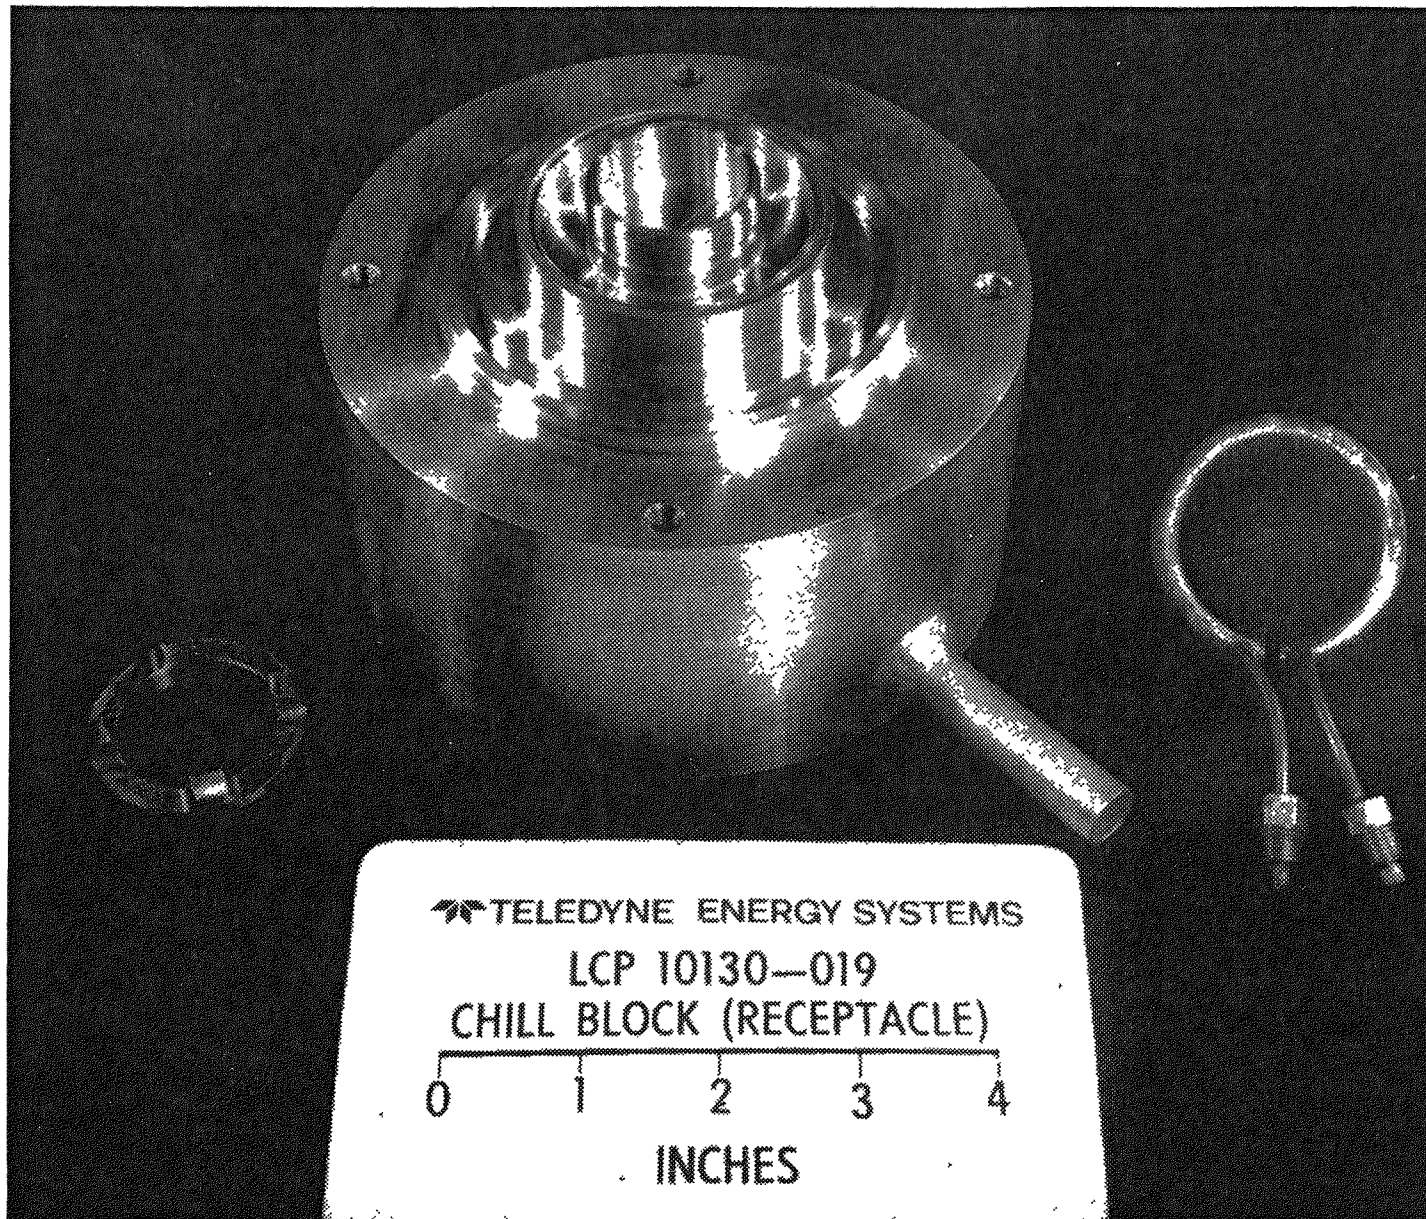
Chill Block Weld Fixture LCP 10130 and Bimetal Ring/Receptacle Test Fixture Assembly
